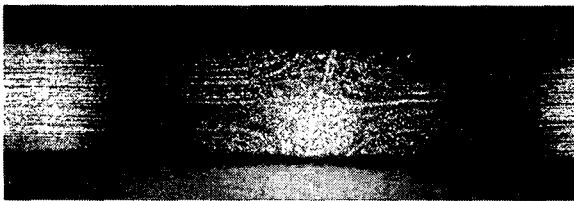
Typical macrostructure of flash butt weldment(x25).
